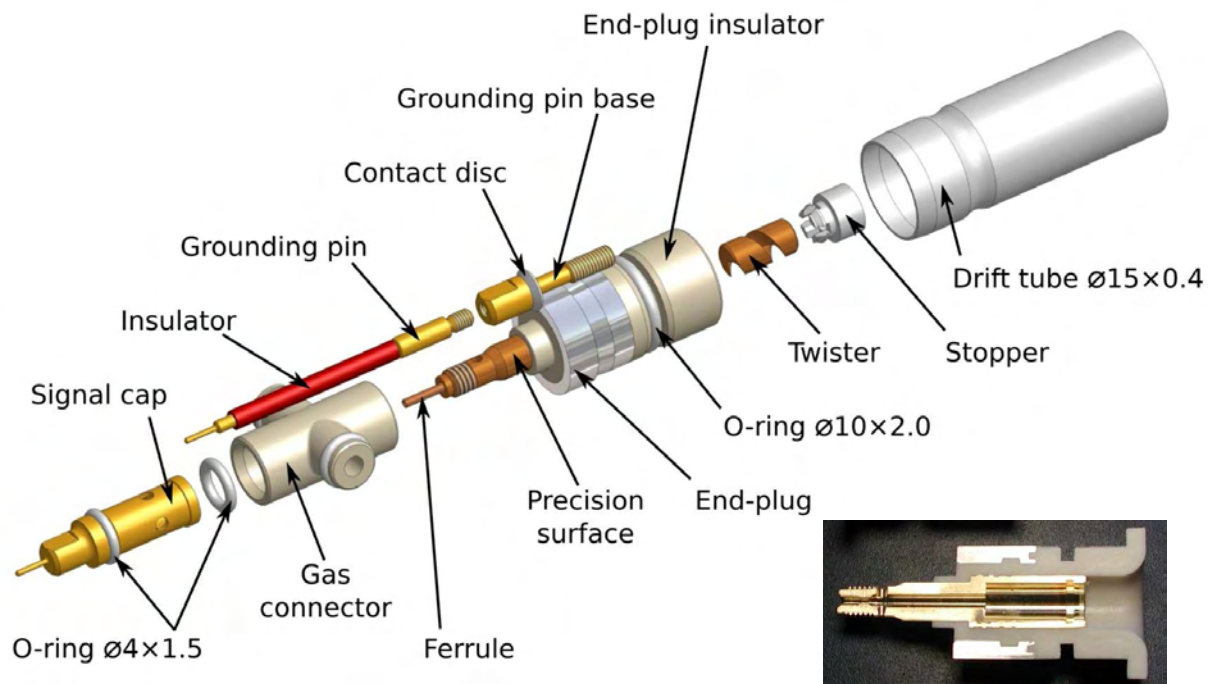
Exploded view of a 15 mm diameter drift tube. The units of the dimensions are mm. The lower right corner shows a photograph of a cut, yet unmachined, end-plug
